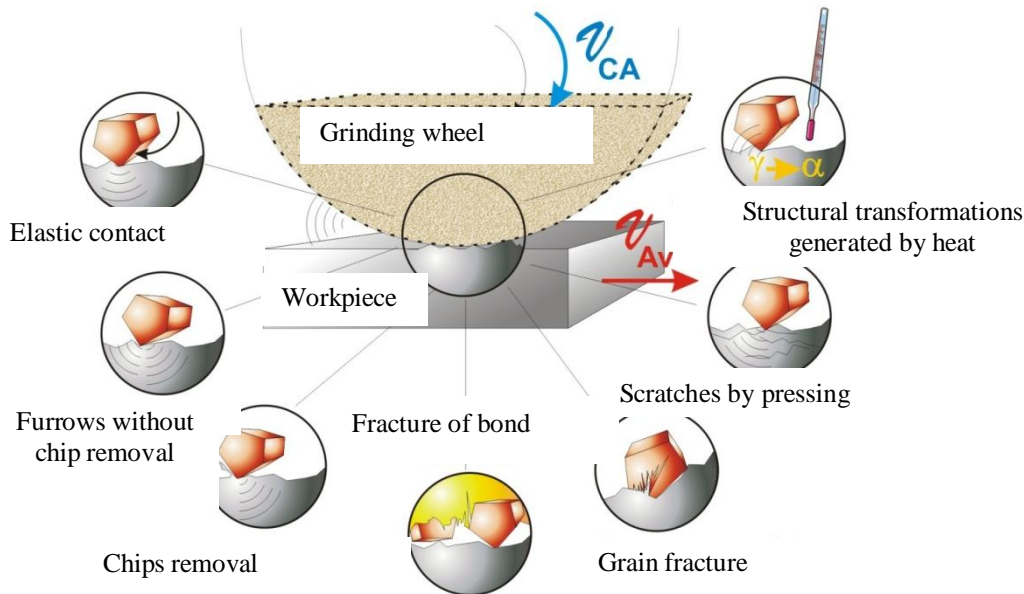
Phenomena that occur in the abrasive tool-workpiece contact area
